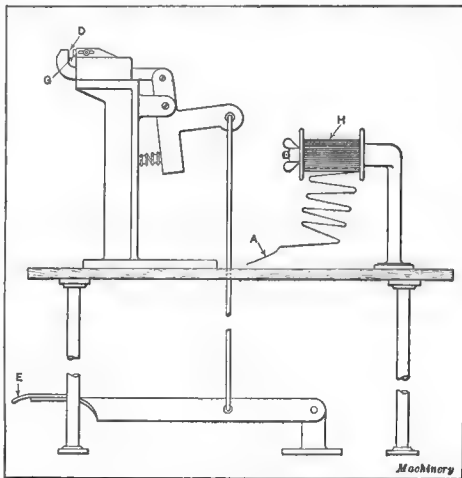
Fixture for clamping Zigzag Filament to Lead-in Wires
